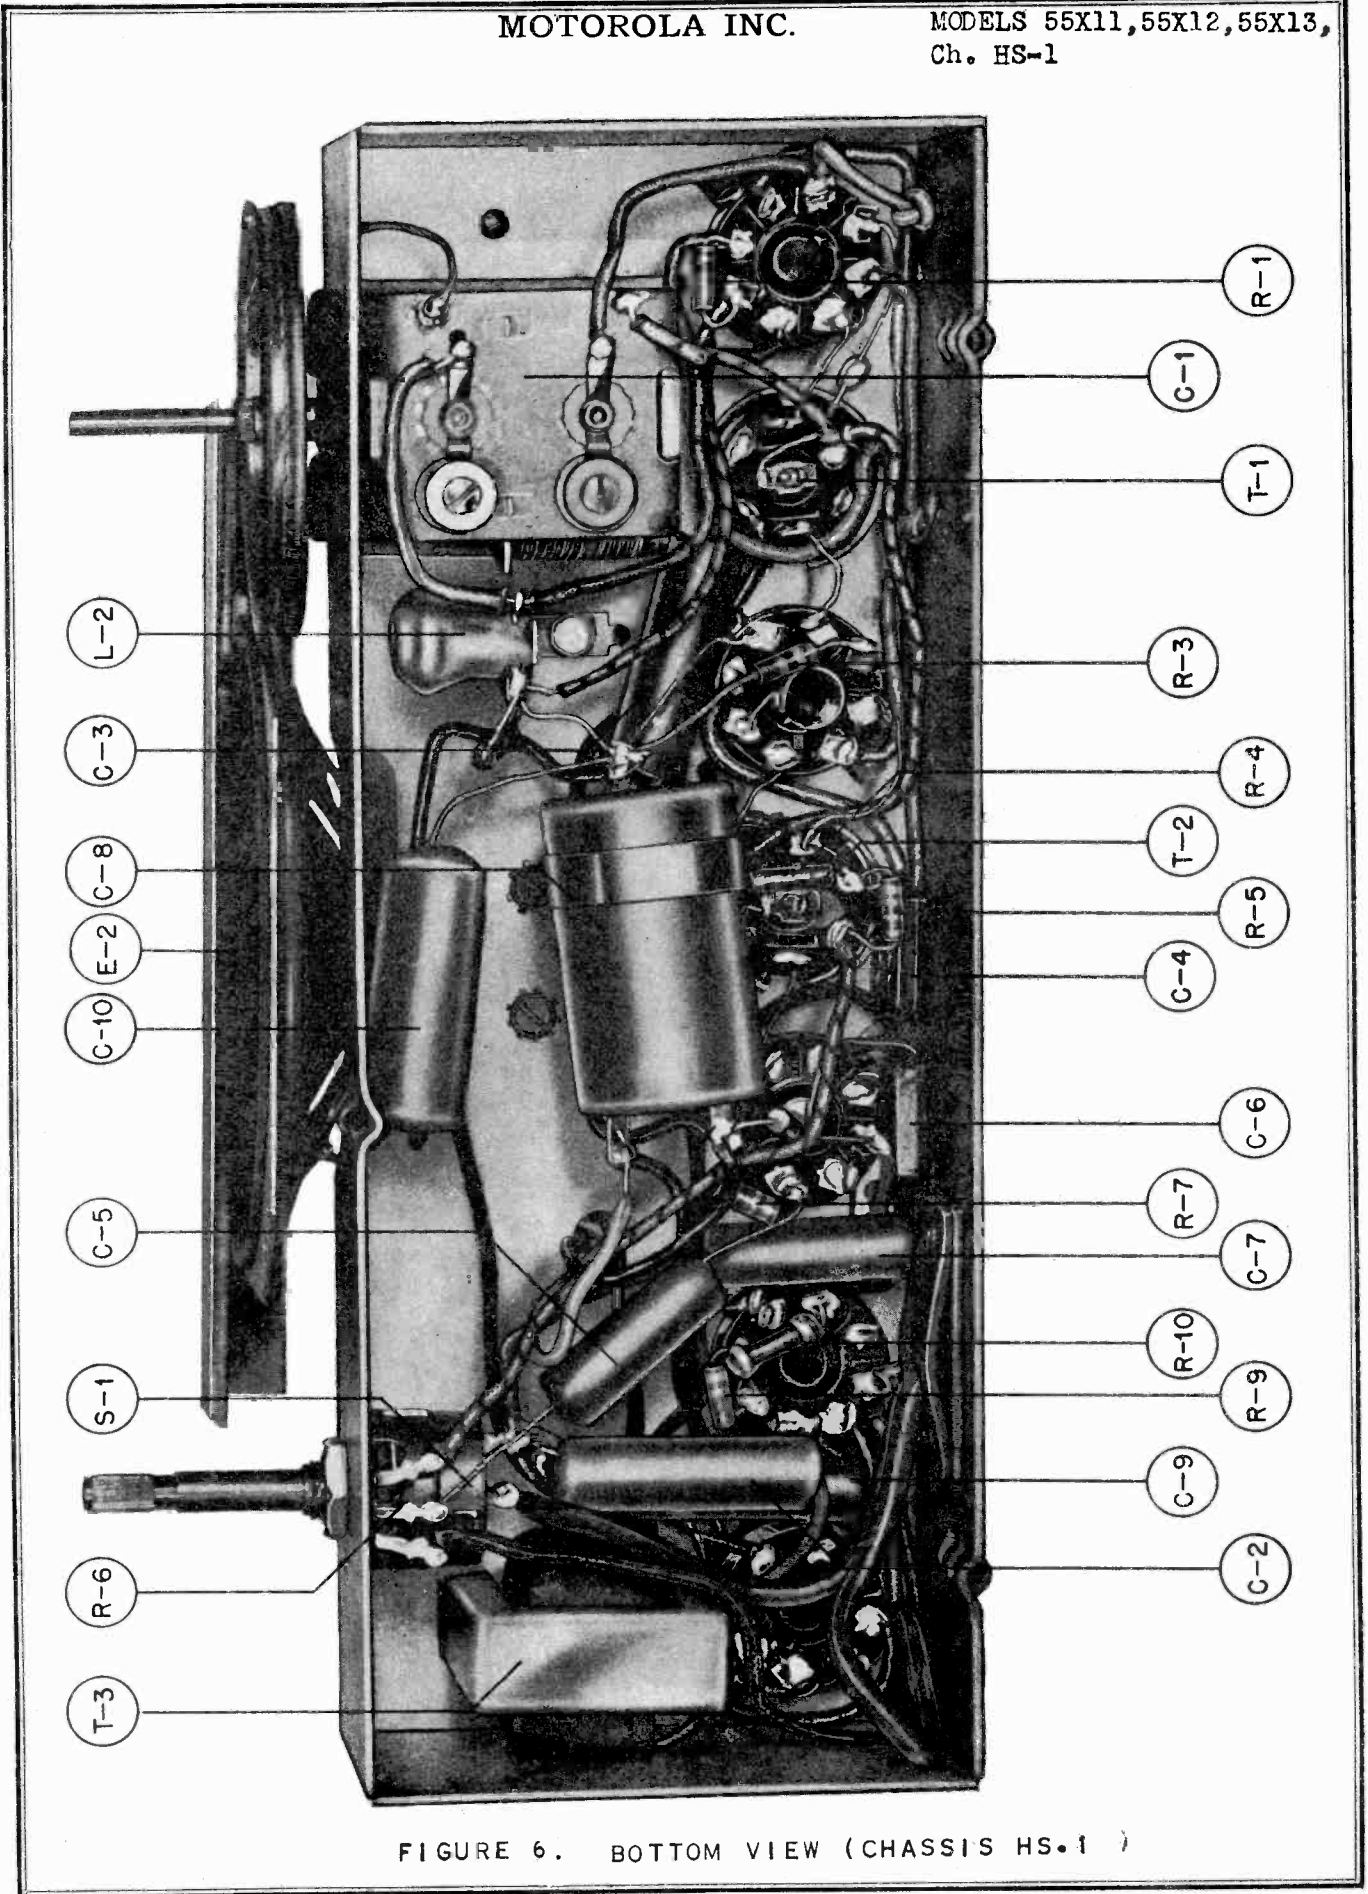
BOTTOM VIEW (CHASSIS HS.1)
